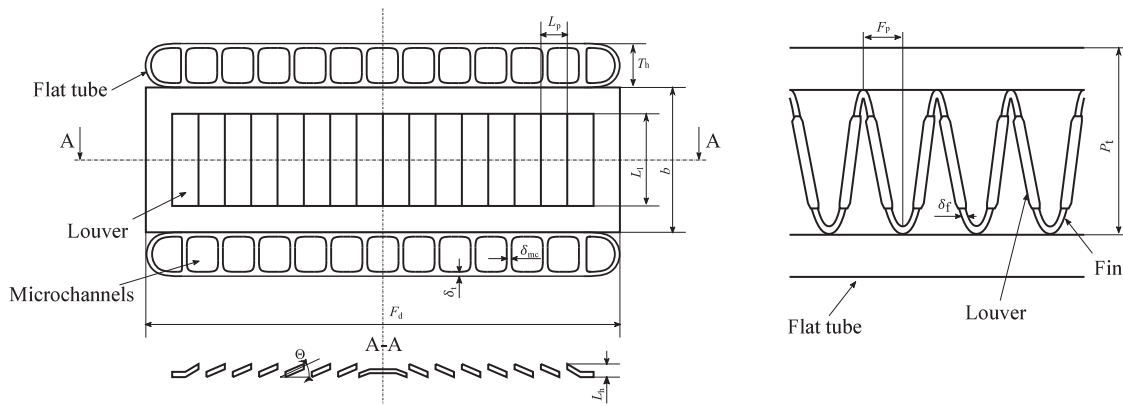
Minichannel flat tubes and multilouvered fins HEX geometry.
